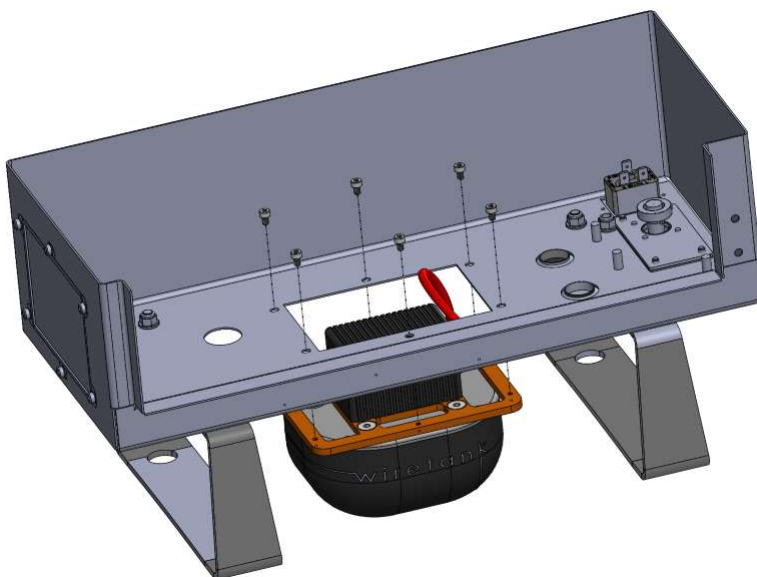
Mounting Plate to Robot Cabinet Assembly
